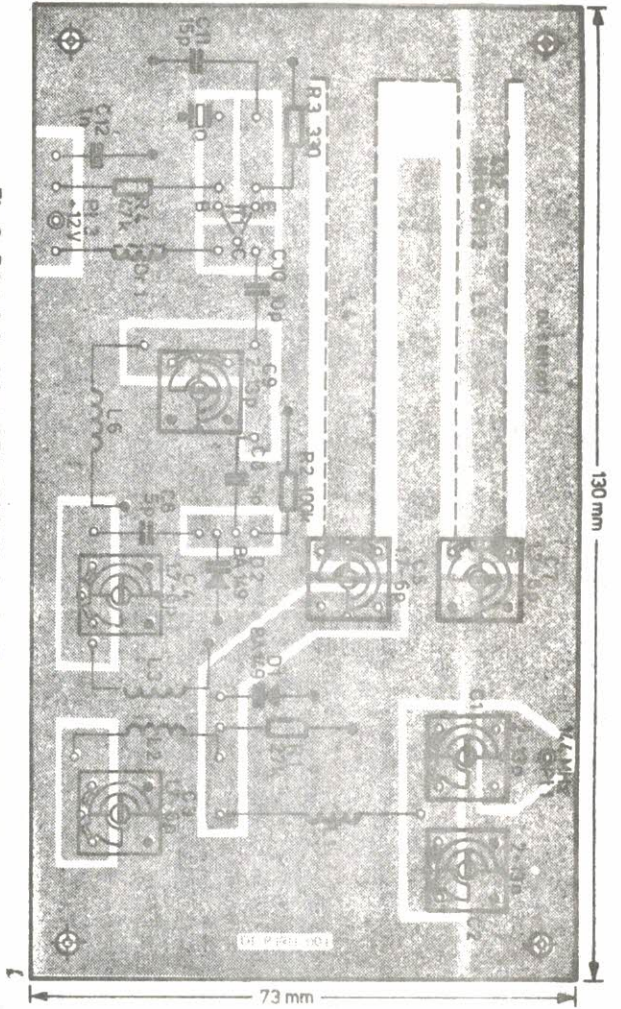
Printed circuit board DL 6 MH 001 showing the component locations
